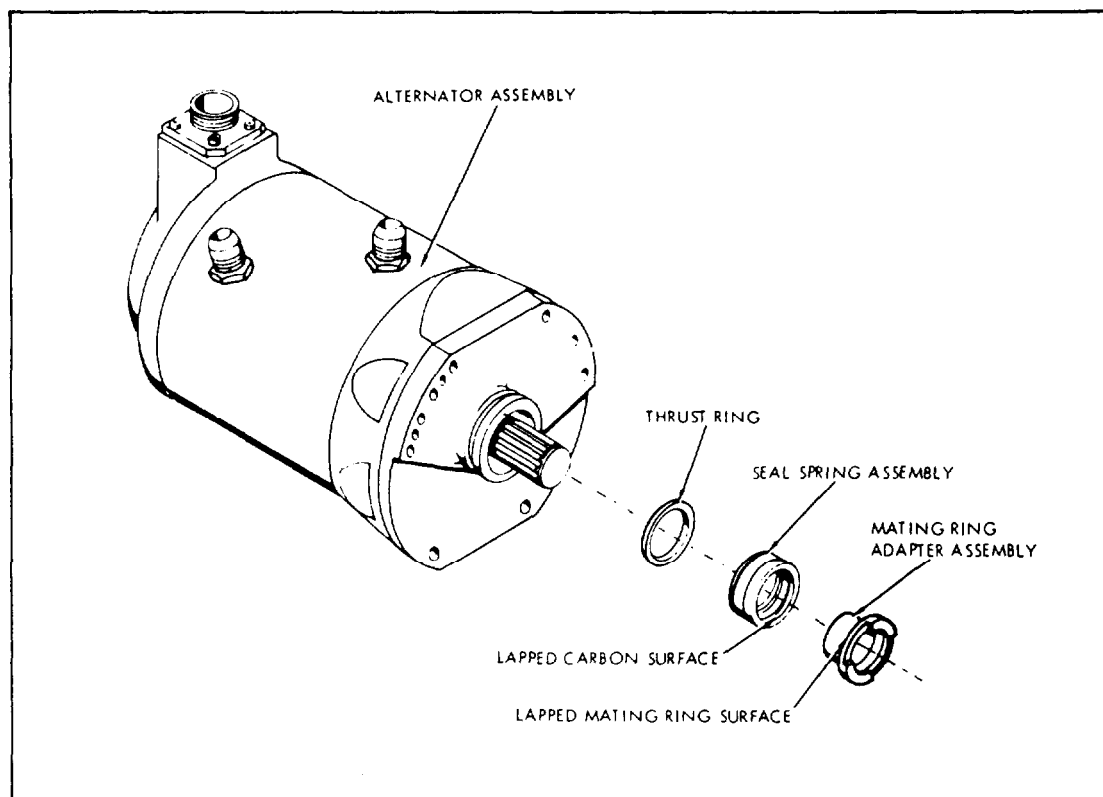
Alternator sealol seal assembly; exploded view.
